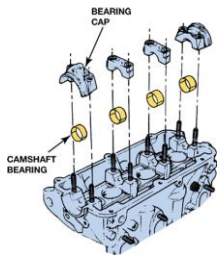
Camshaft bearings must be installed correctly so that oil passages are not blocked.
